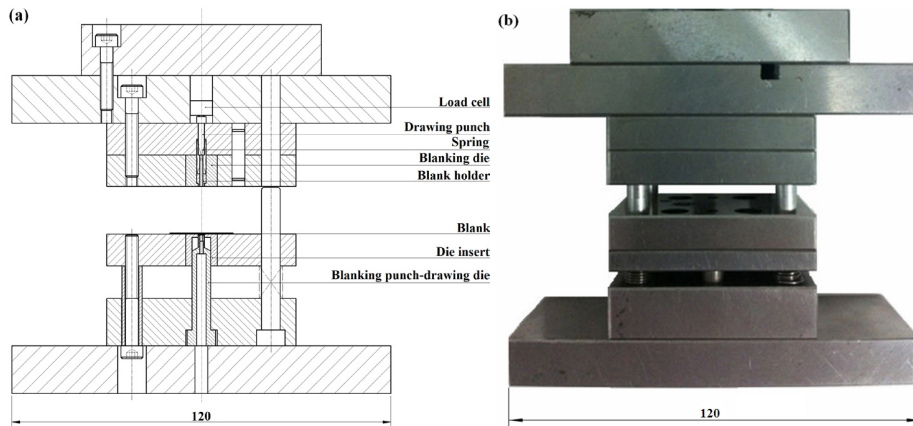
Micro blanking-deep drawing mould (a) schematic and (b) photograph.
